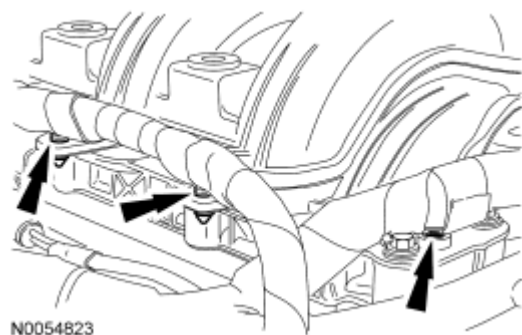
Locating Wiring Harness Retainers From Upper Intake Manifold
